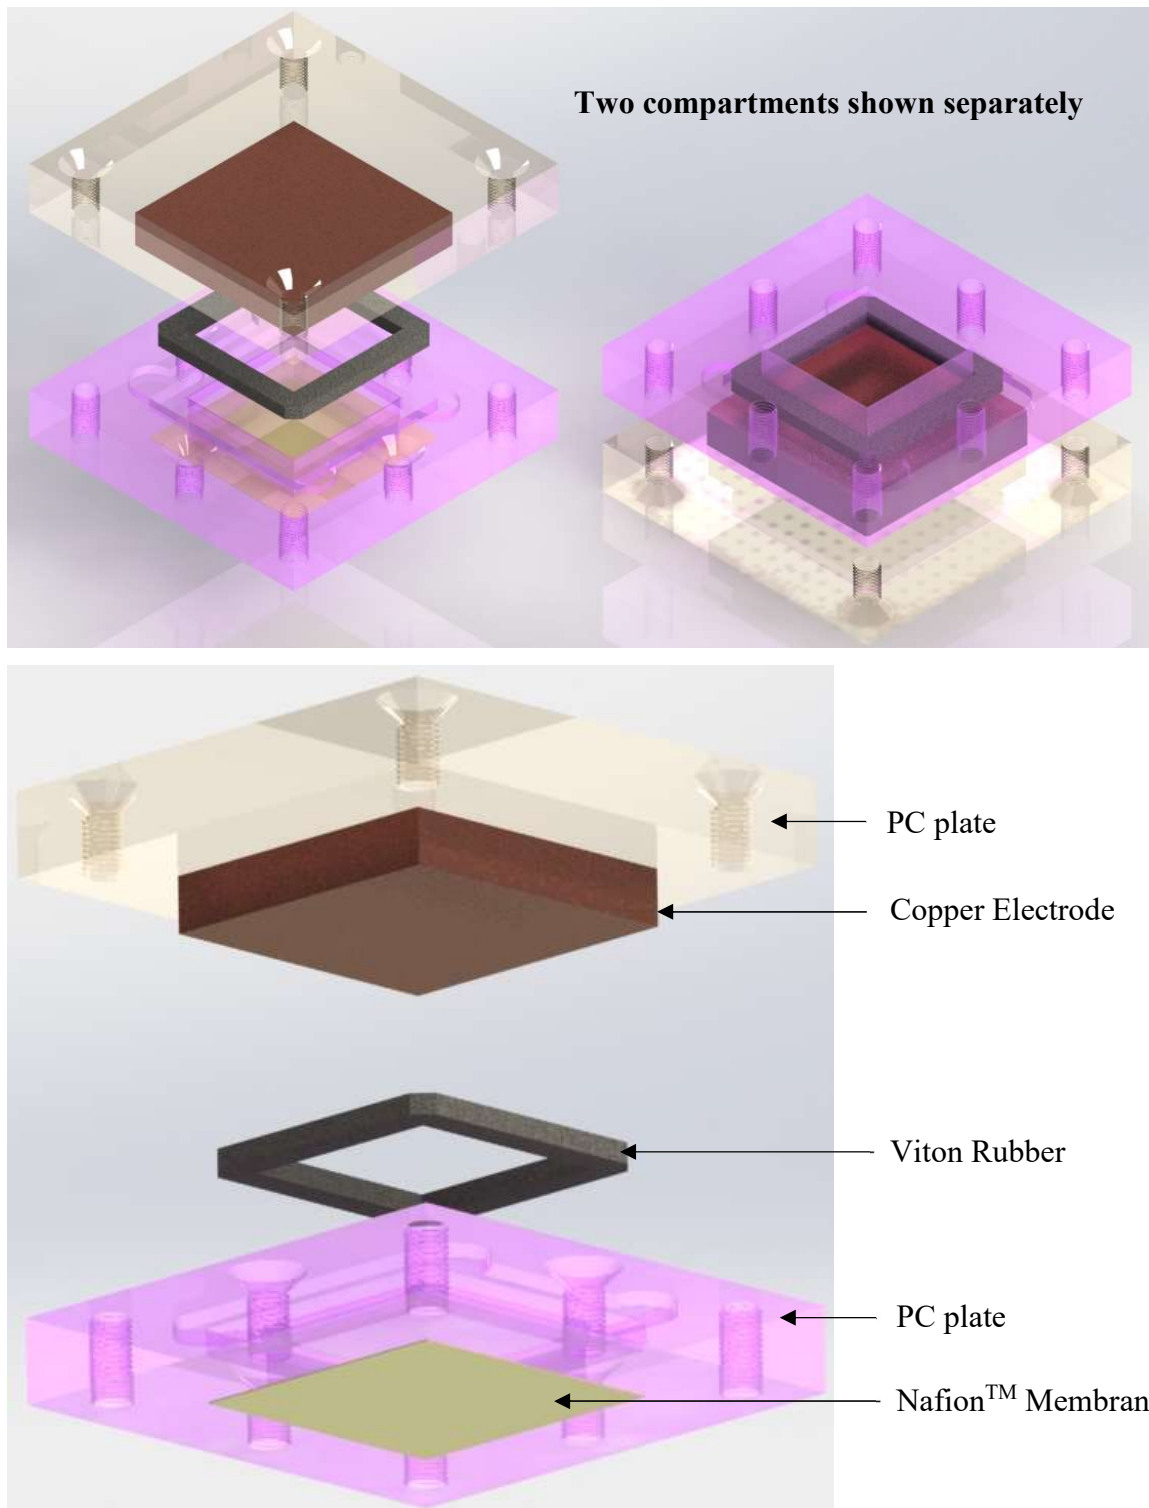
Exploded view of the MFC design. Top images illustrate the complete MFC; since the two compartments are identical the bottom image is an exploded view of one of the compartments of the cell (drawn with SolidWorks software 2017).
